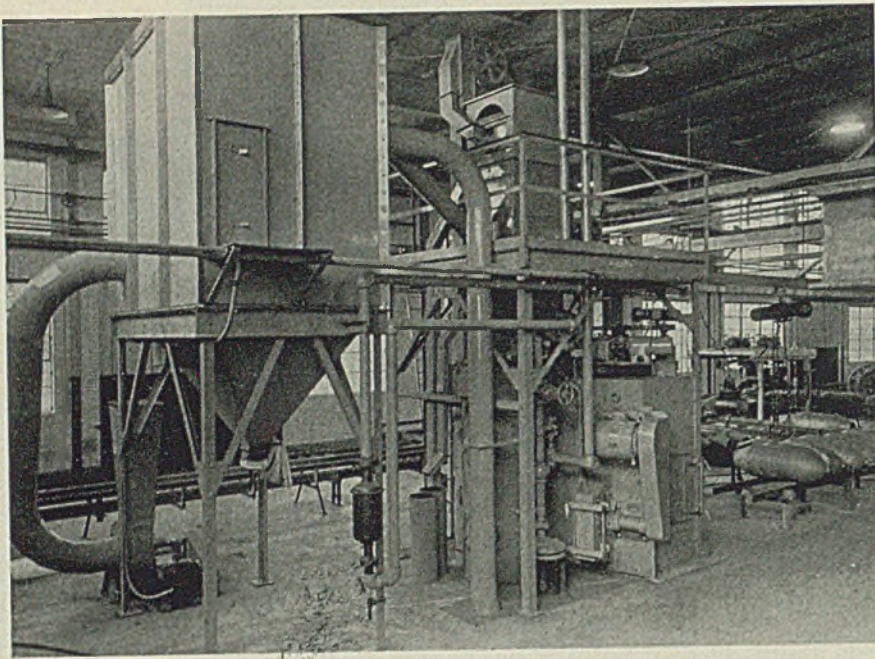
Oblique rear view of blast cleaning machine showing ventilating system
